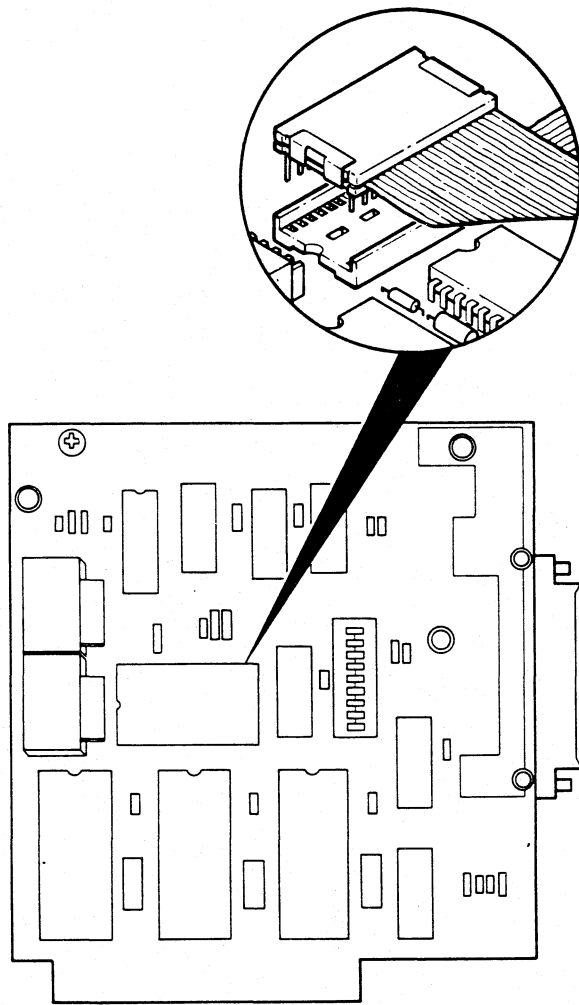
16-Pin Flat Cable on Terminal Controller
